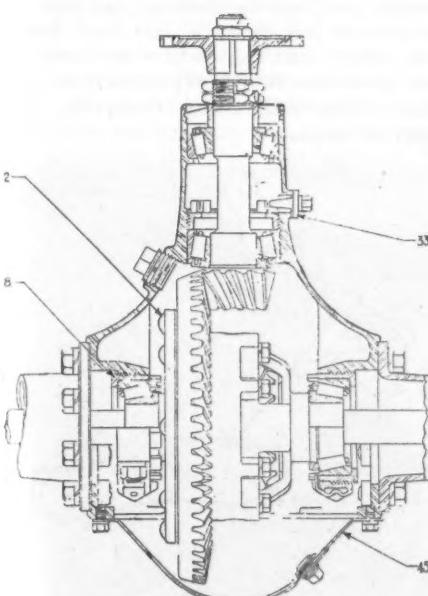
Sectional view of the Nash rear axle assembly showing points of adjustment
